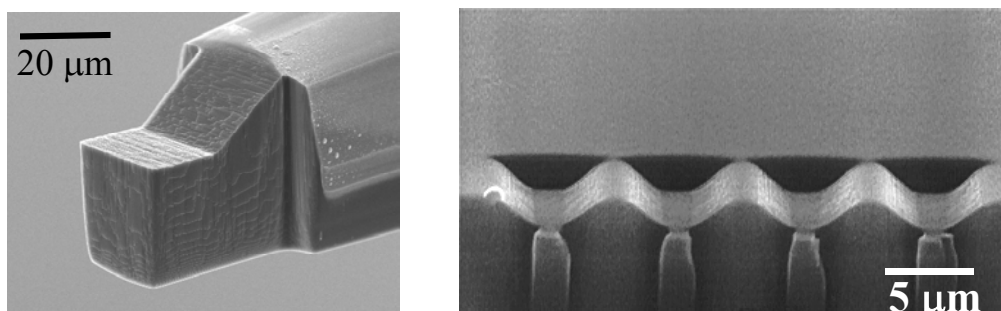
Image on left is a FIB shaped micro-cutting tool used for ultra-precision lathe machining. It was sculpted from a single crystal diamond tool blank. Image on right is a sinusoidal feature FIB machined into Si using 3-d ion milling software.
